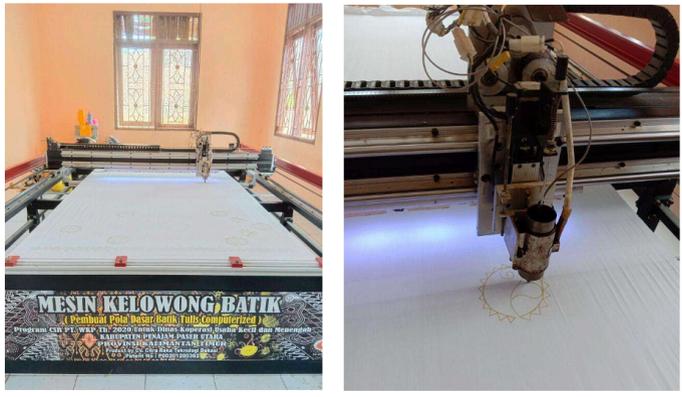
(1) CNC Machine, (2) Motif Drawing Process
